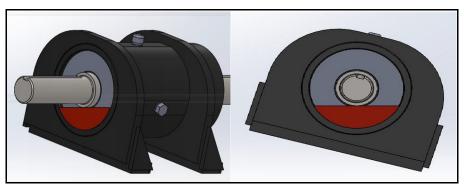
Correct Rotor Bearing Cartridge Oil Level
